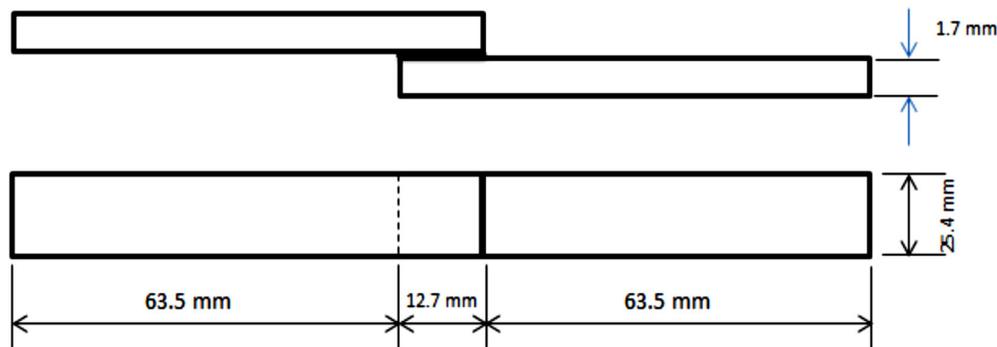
Single-lap joint specimen dimension according to ASTM-D1002
